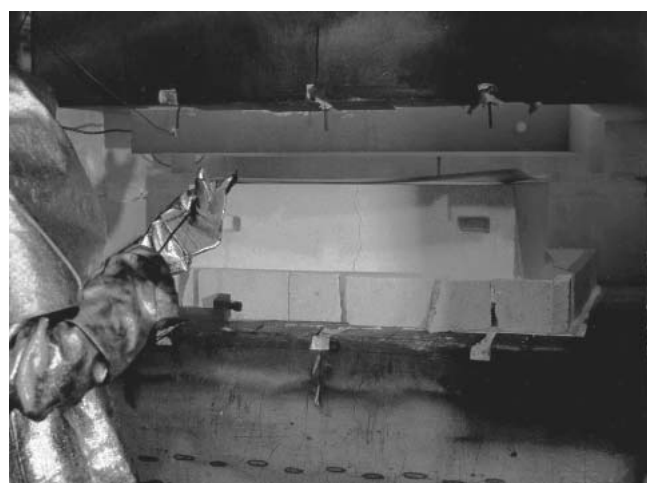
An SPF press operator removing a hot part from a stand alone planar seal ceramic die. Note that the CRES lid (upper die half) is used to make a seal with lower die cavity.
